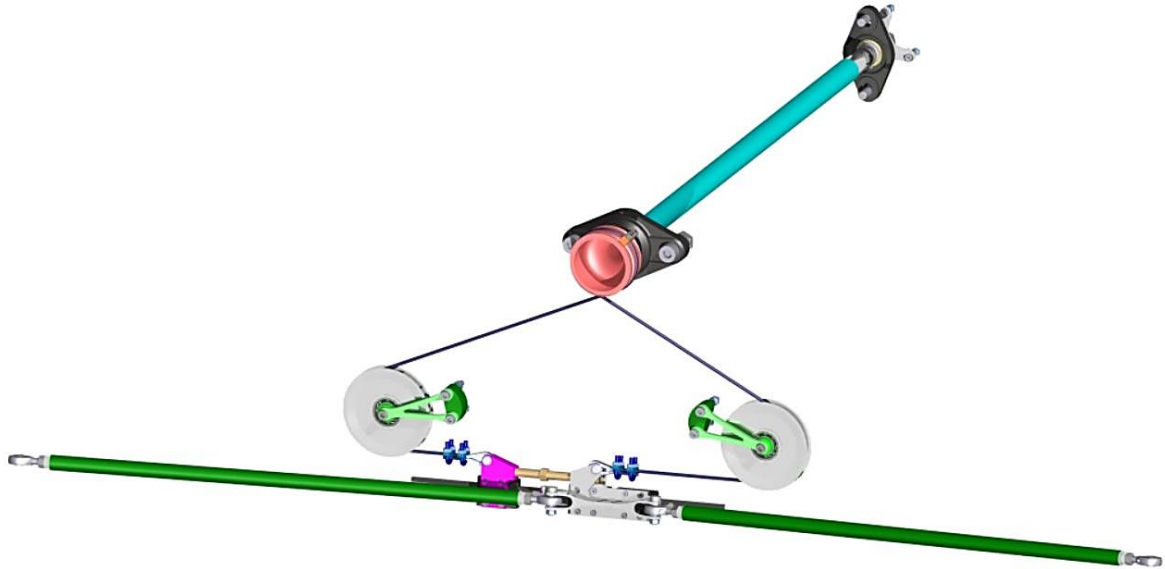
muc022 Steering System (isometric view) (Final CAD Drawing, CATIA V5)
